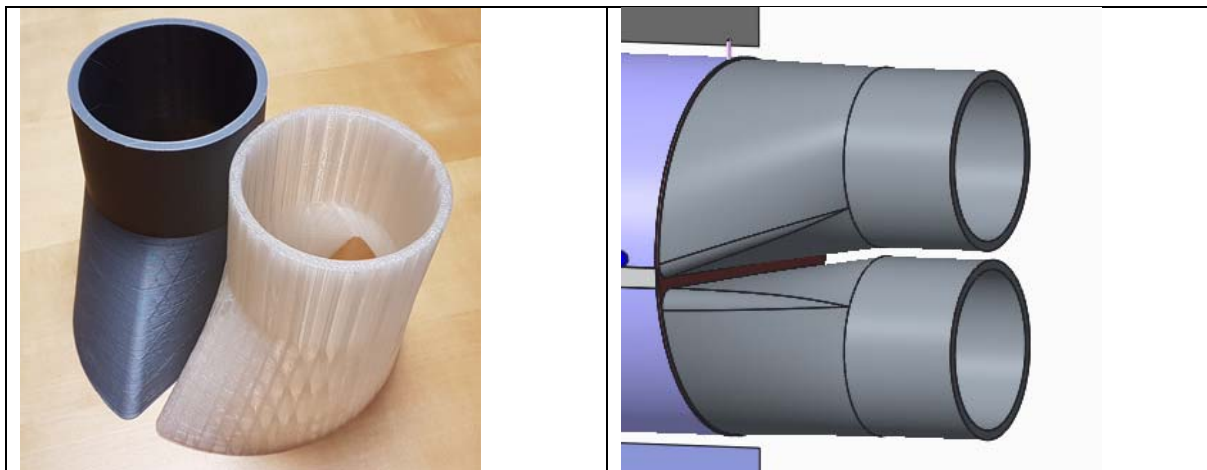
3D-printed attachments used to measure air flow through the unit.
